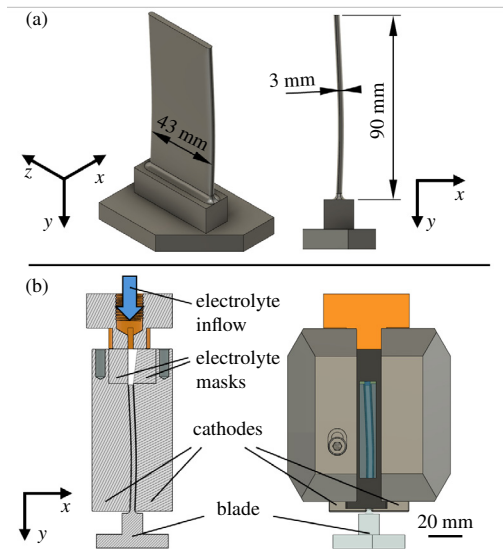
(a) Dimensions of the blade geometry. (b) Components of the (P)ECM machining setup, depicted in a cut view (left) and with the surrounding machine components (right).
